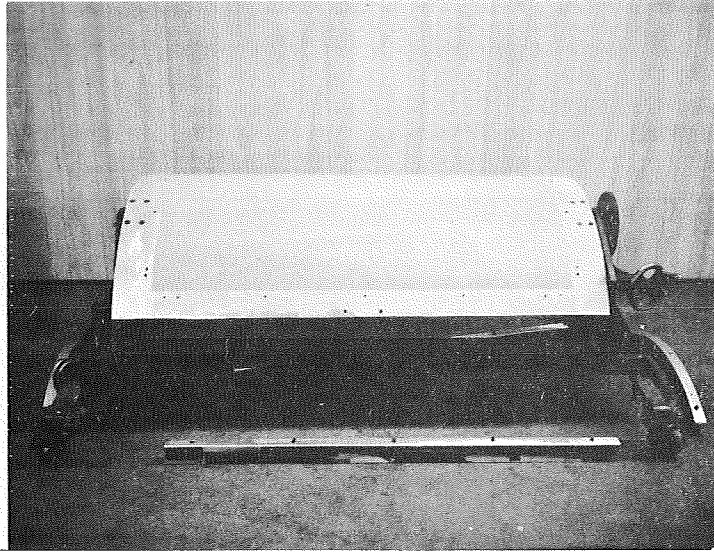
Face Sheet Lay-up Prior to Mounting of Rails
